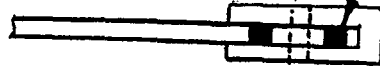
Single Spot Weld Coupon for In-Plane Rotation Test
